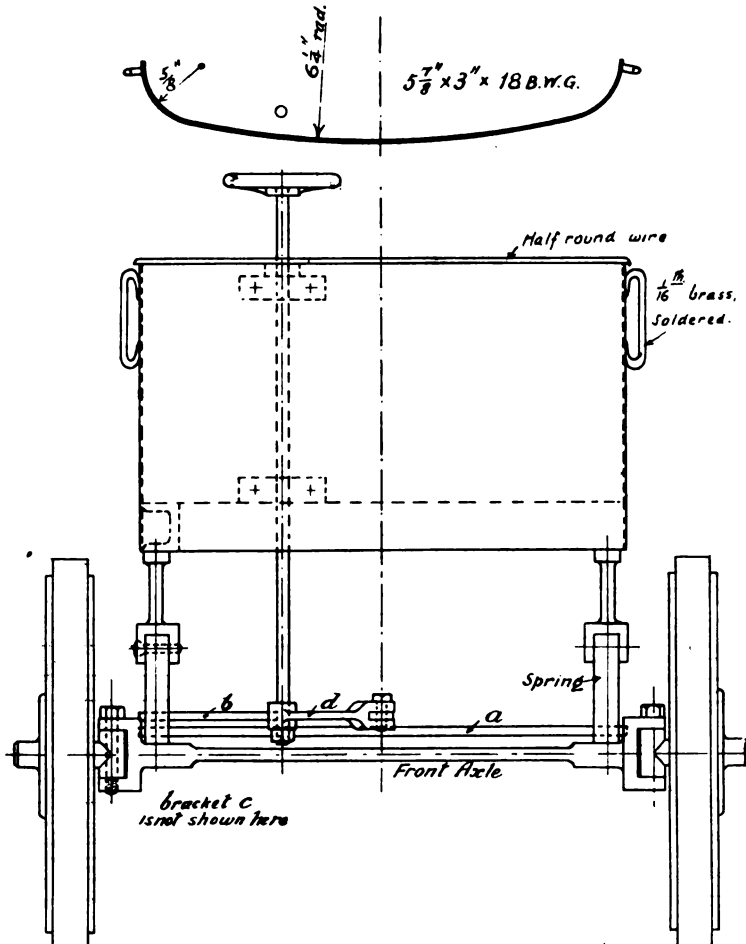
VIEW SHOWING ARRANGEMENT OF FRONT PLATE, STEERING GEAR, AND FRONT AXLE. (Half full size.)
